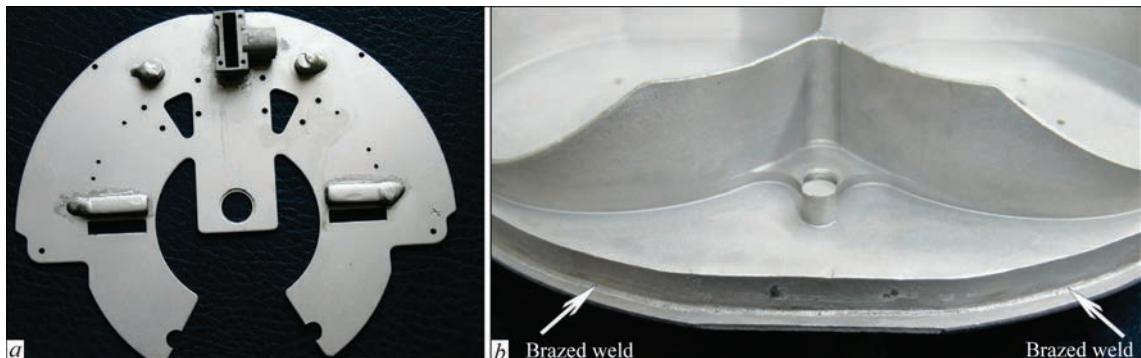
Appearance of thin-walled aluminium waveguide (a), brazed weld along the perimeter of the structure (b)
